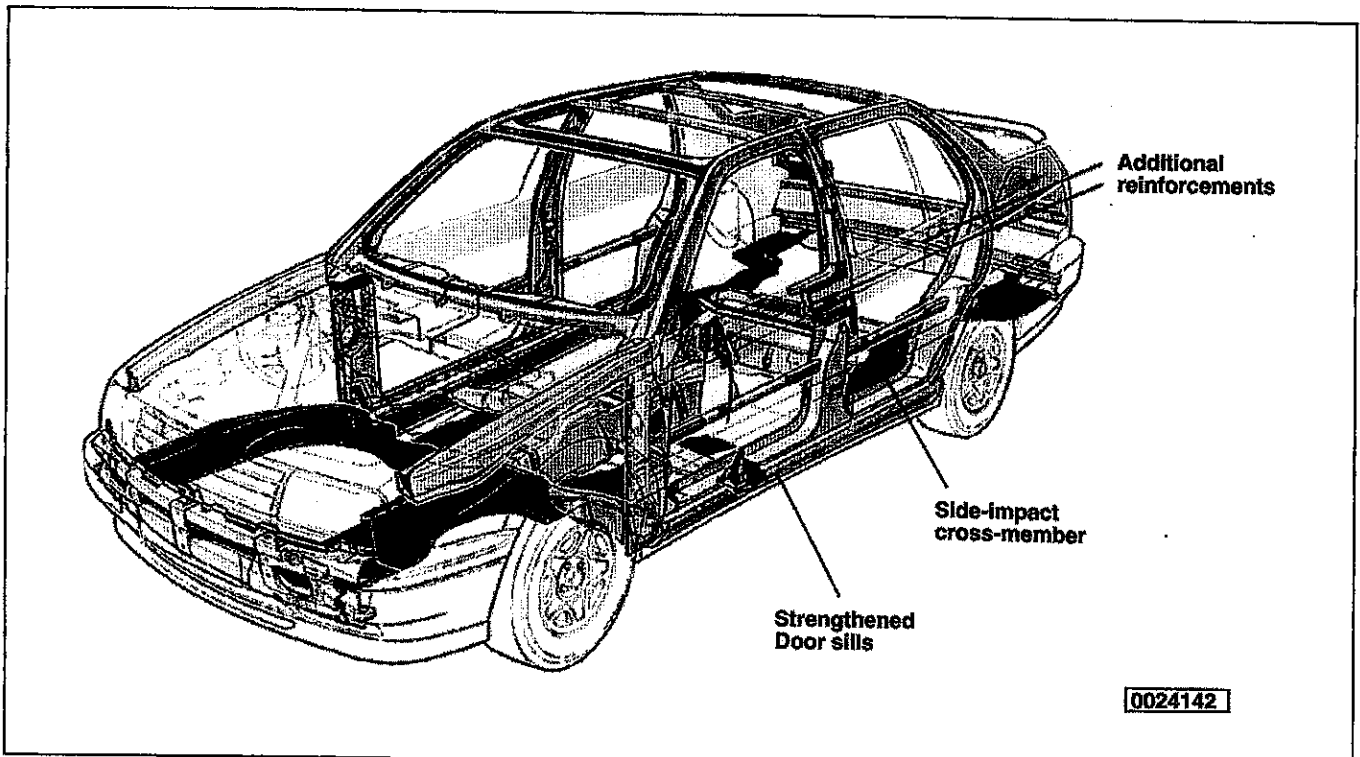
Structural body members of Jetta models (Golf and GTI similar).
